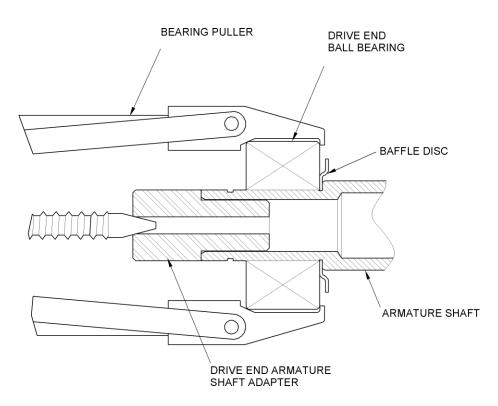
Remove Drive End Bearing and Baffle Disc (Non-Preload)
